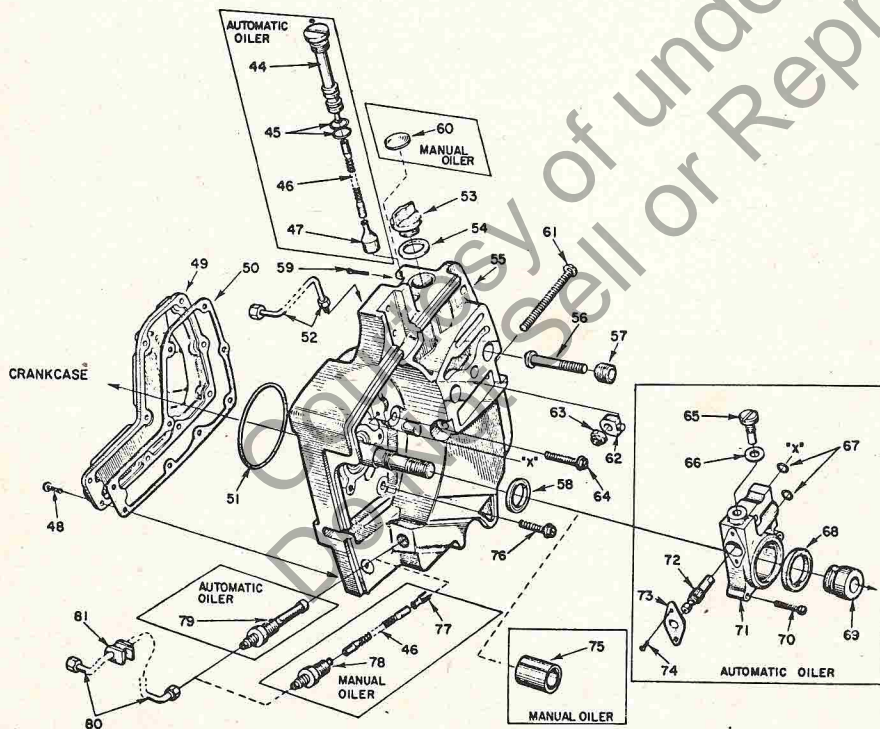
A — Exploded view of late drive case assembly used on models having ball bearing main at drive end of crankshaft. Parts shown in "boxes" indicate differences between automatic chain oiler ("AO" models) and model with manual oiler pump. Refer to Fig. HL40B for schematic view showing operation of oiler pump.
